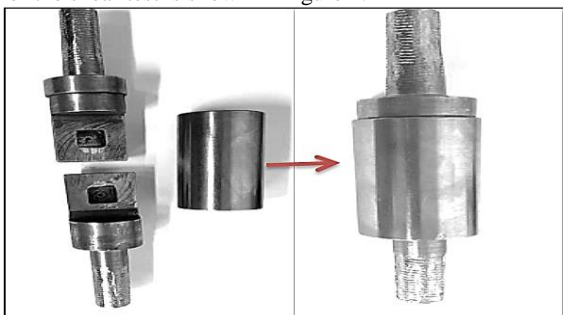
The fixture schematic diagram and the manufactured fixture for shear test.
